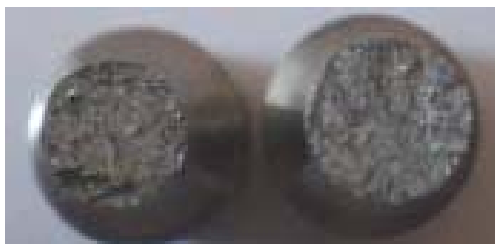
Appearance of fracture surfaces of the specimen for the testing of contraction in z-direction
